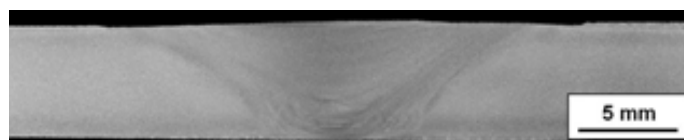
Results of the macroscopic metallographic tests of the FSW test joint; joint thickness: 6 mm; etchant: Keller's reagent
